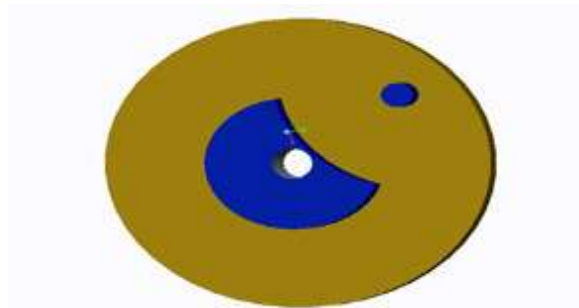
DRIVER WHEEL 3D DESIGN
